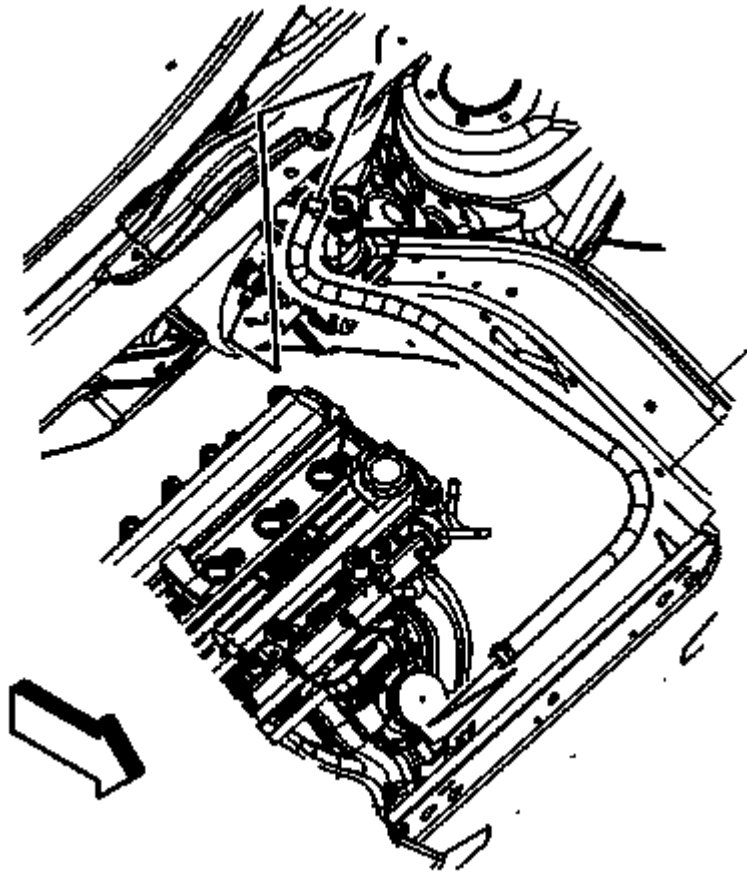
Identifying Brake Booster Vacuum Hose & Clamps
